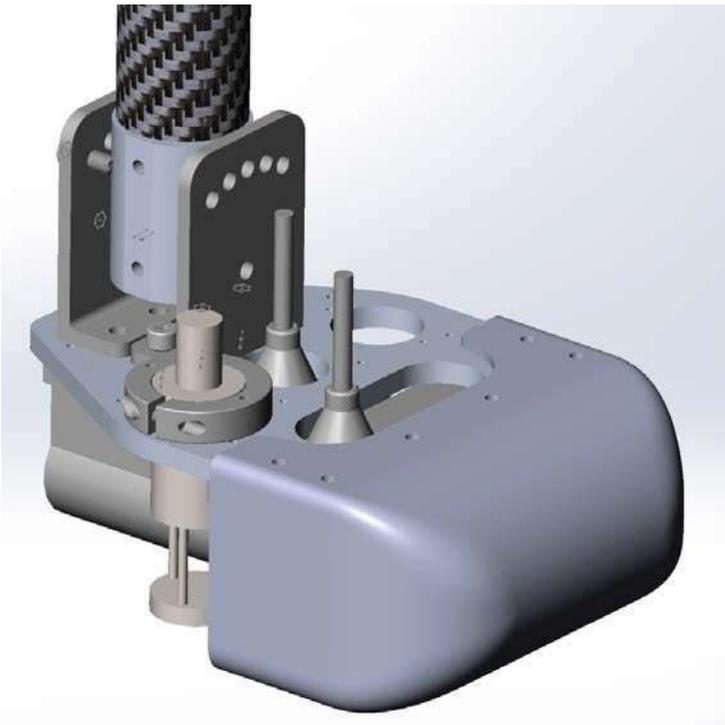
PicoMBES 120 sensor assembly with protective cover CAD model
